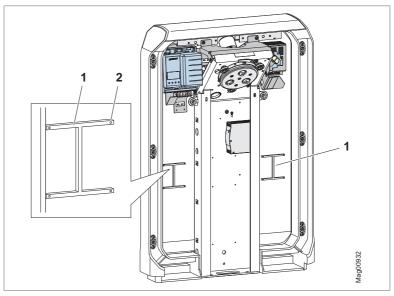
Rear panel mounting options – mTripod FMTP-MS only
